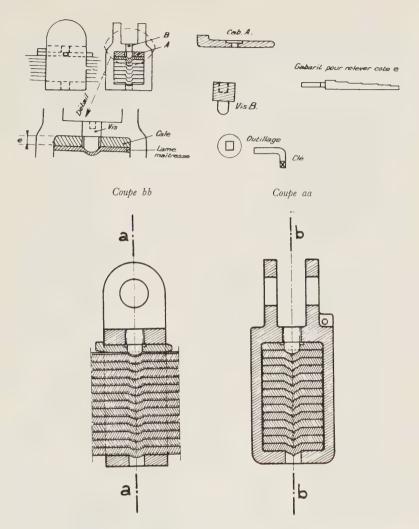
and 20. — Cold bucking of springs. — A. Packing piece uniform thichness machined as needed. — B. Locking screw. The process has been in use for many years on C. F. F. electric locomotives.
